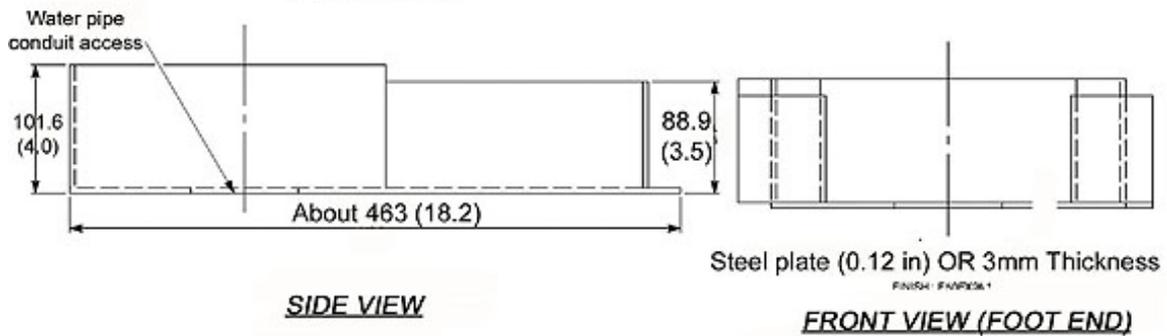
Cable Conduit For On-Grade Floor Anchor Kit
